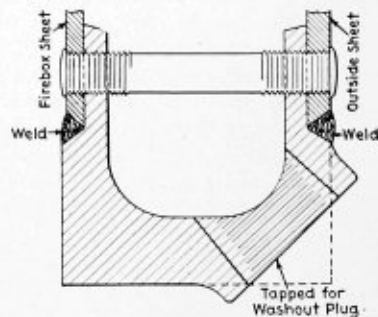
Sectional view of mud ring showing method of attaching to firebox sheets
